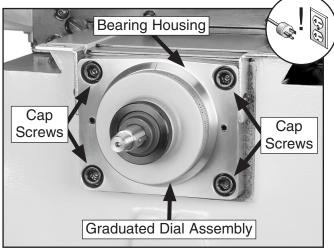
Cross feed graduated dial assembly and bearing housing with ball handle removed.
